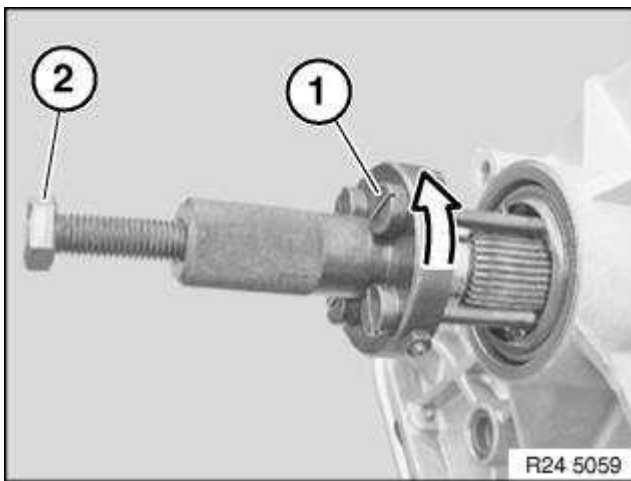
Screw In Bolt (2) Until Radial Shaft Seal Is Released
